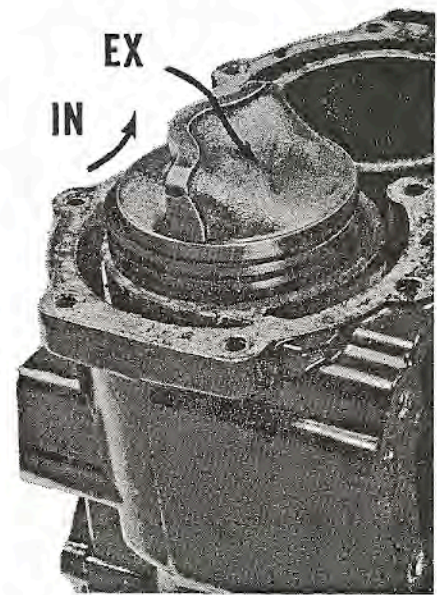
Piston correctly installed in cylinder, showing relation of piston baffle to inlet and exhaust ports.
